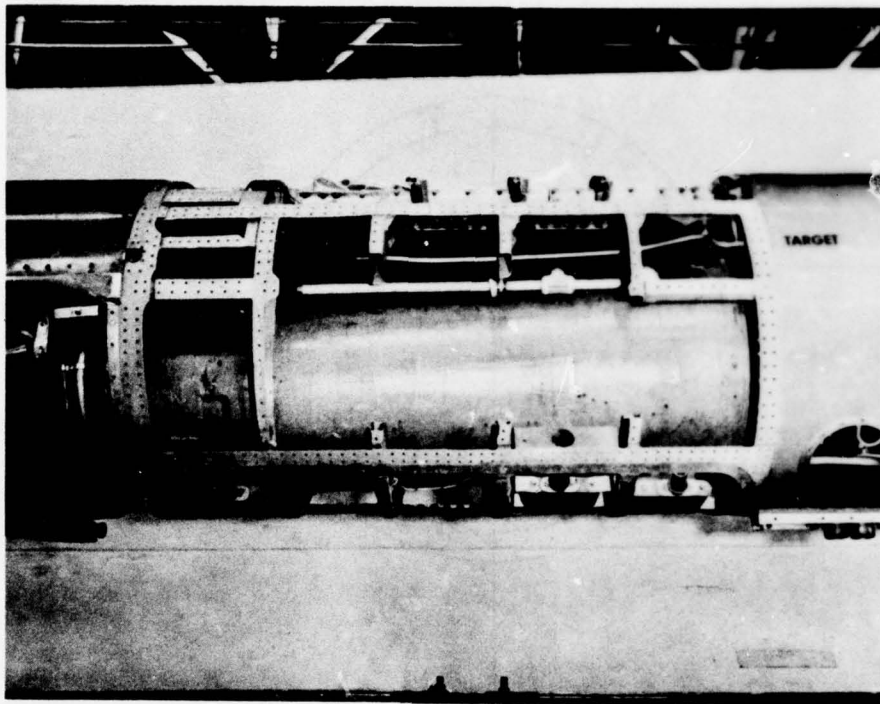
Left Side of Centerbody Section With Skins Removed
